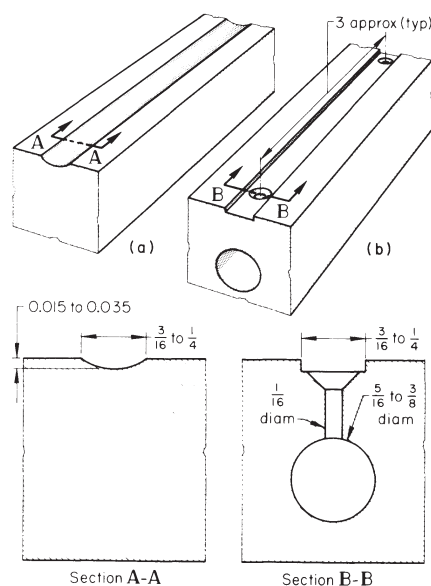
Groove configurations for backing bars. (a) Standard groove for use without a backing gas. (b) Square-corner groove employed with backing gas (groove depth depends on gas flow required and length of bar). Dimensions given in inches
